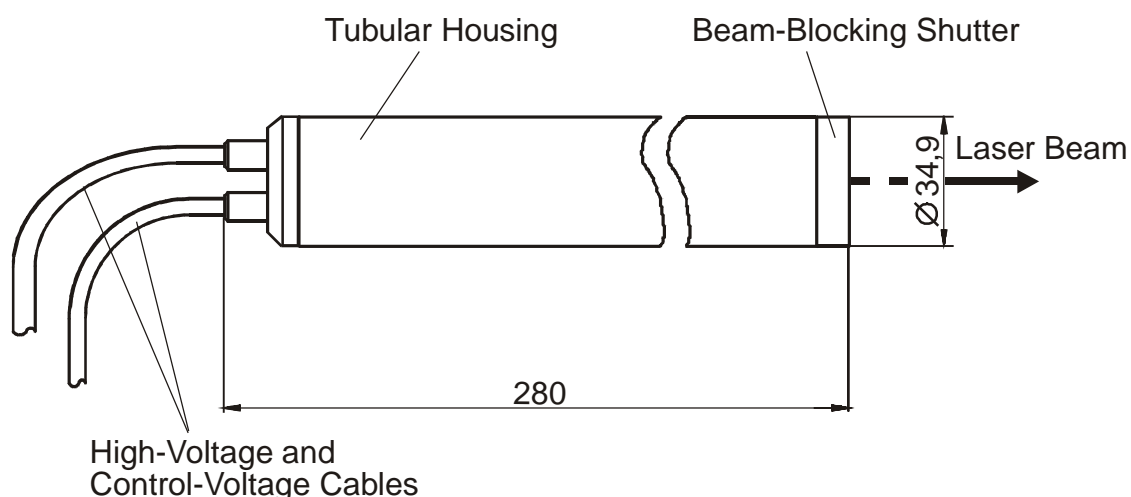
Laser-head dimensions and the locations of the connectors and beam-blocking shutter mounted on the laser head.
